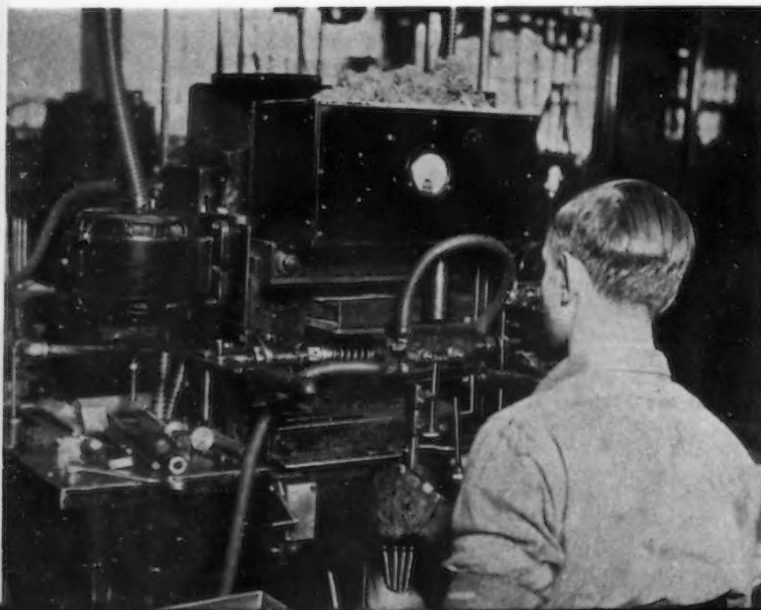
Many valves are hardened in this machine, which incorporates "electric eye" heat control. The stem is held between copper jaws that serve as electrodes.
